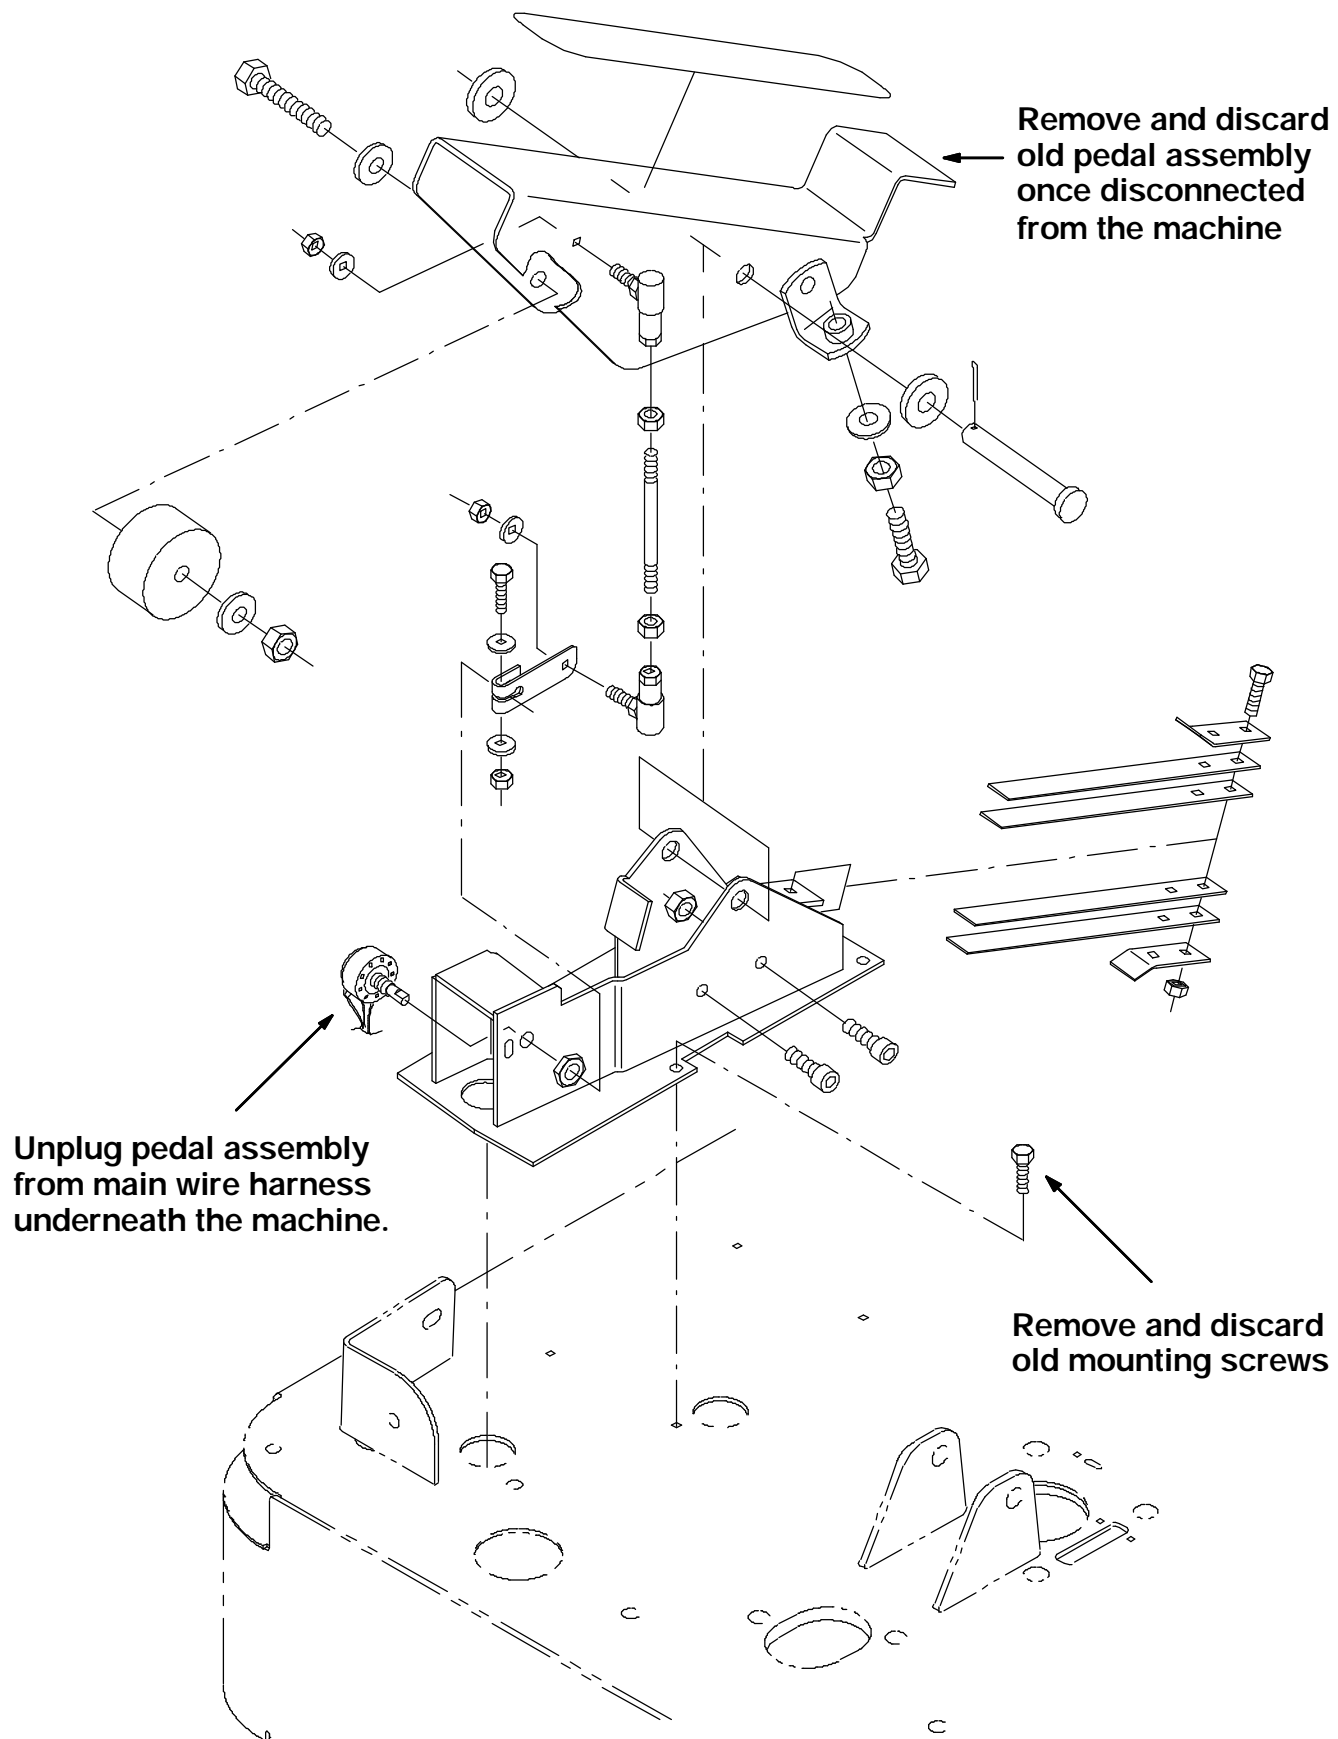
PEDAL ASSEMBLY REMOVAL
